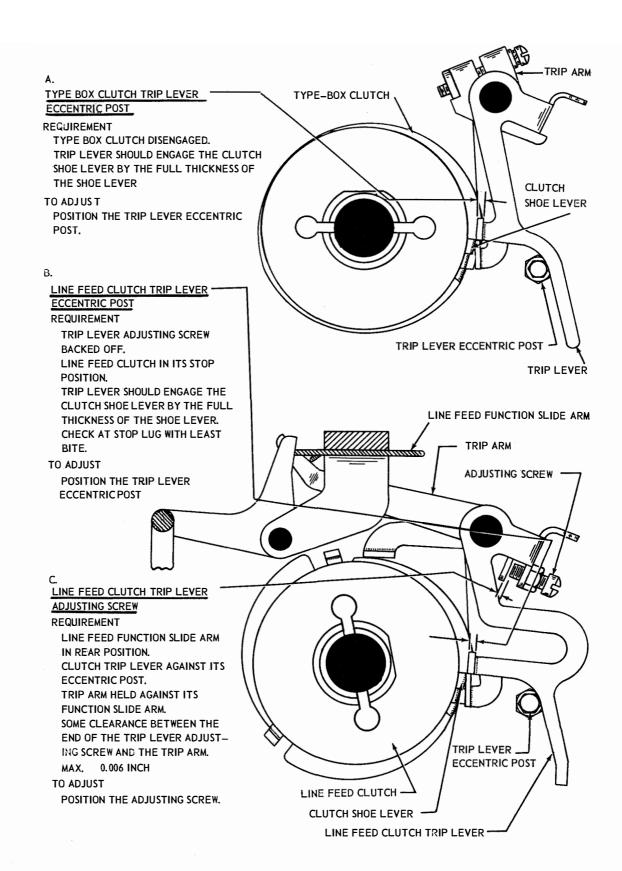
TYPING UNIT, TYPE BOX CLUTCH AND LINE FEED CLUTCH MECHANISM
